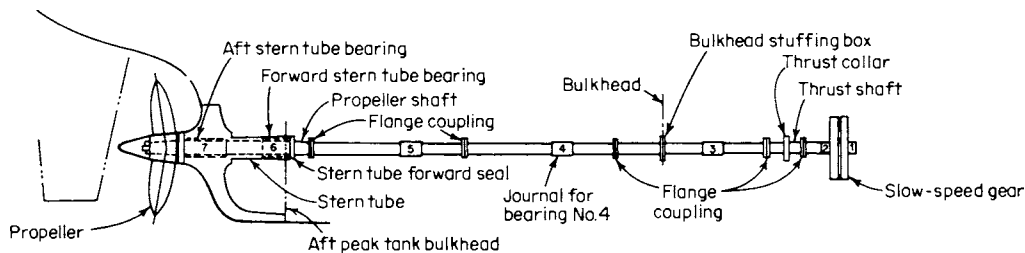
Shafting arrangement without strut bearings. (From "Marine Engineering," SNAME, 1992.)
